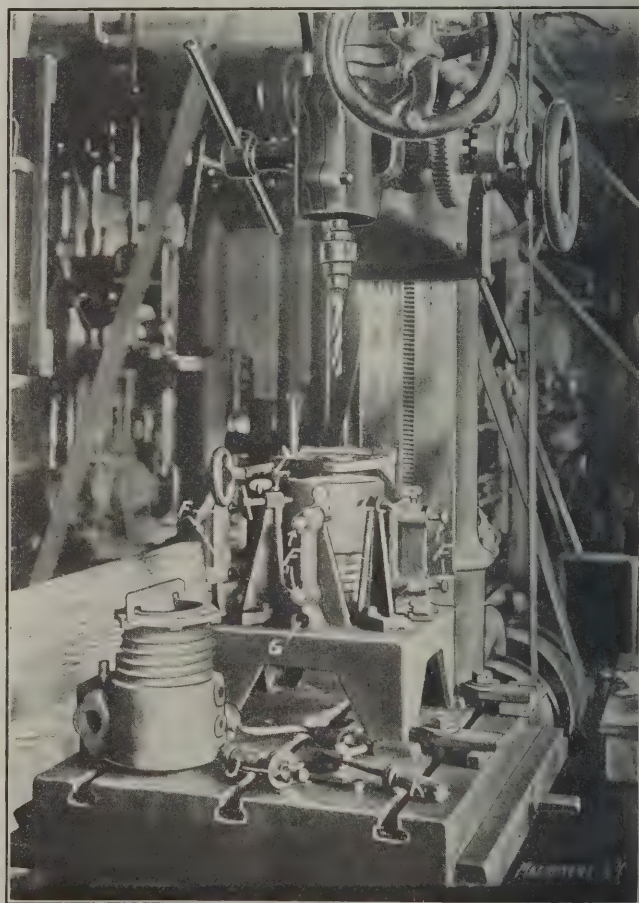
Laying Out Templet and Spotting Fixture for Cylinders.
